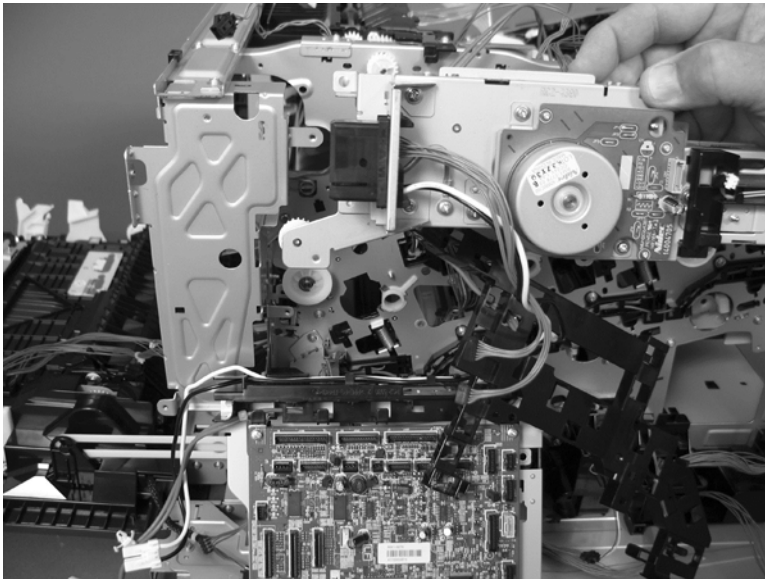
Remove the fuser drive assembly (5 of 6)
